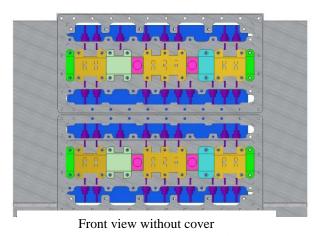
CAD Layout of Ku Band Channel Amplifier
